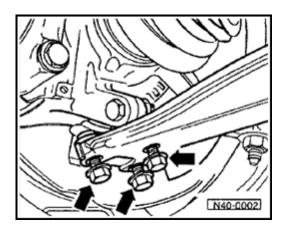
Wheel bearing housing/suspension strut joint, separating
